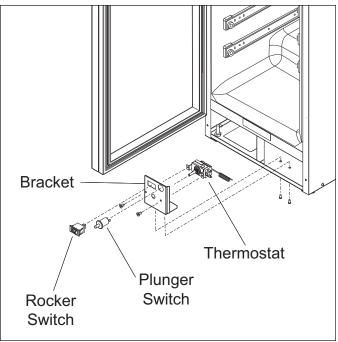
Light Switch, Plunger Switch and Thermostat Removal
